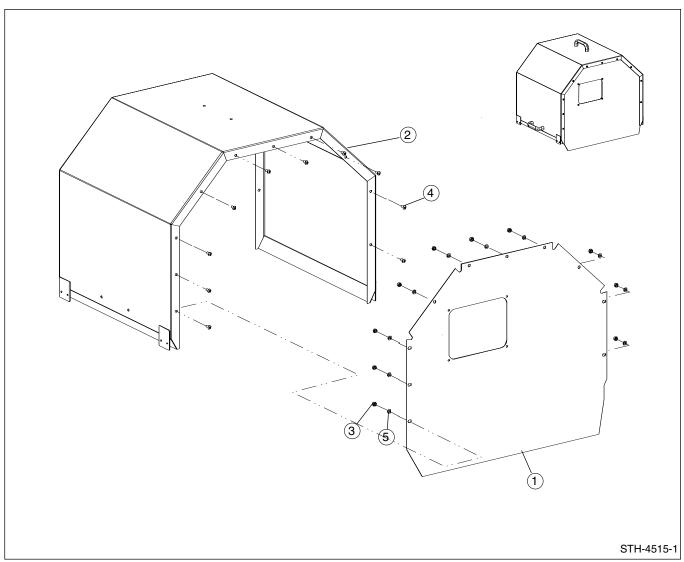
FIGURE L - REMOVABLE SPLASH GUARD ASSEMBLY, REAR (1 of 2)
